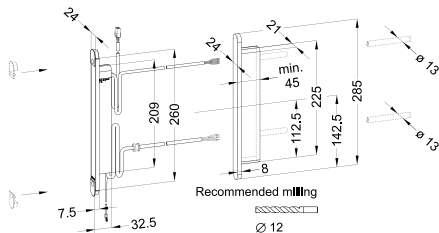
Cutting dimensions for frame power supply with covers
